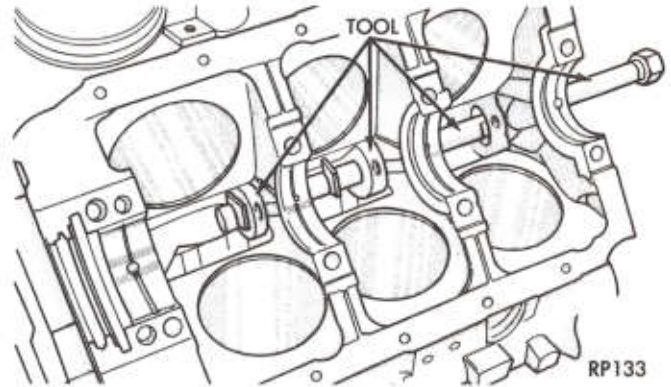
Removal and Installation of Camshaft Bearings with Tool C-3132A
